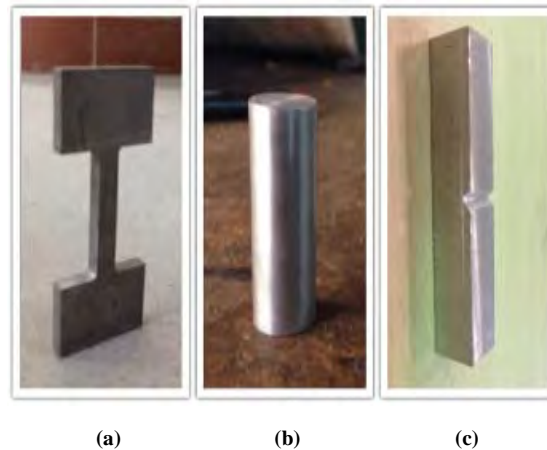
Photographs of test specimens (a) Tensile (b) Compression (c) Impact
